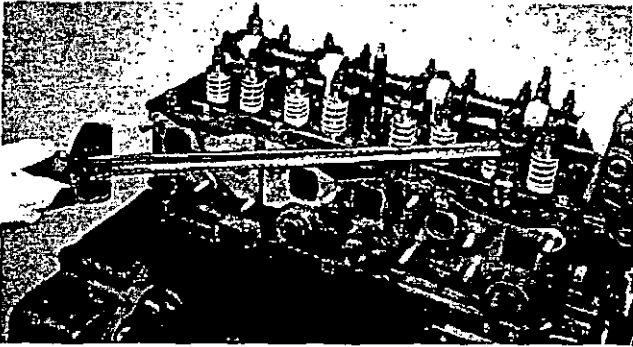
Tightening Cylinder Head Studs with a Torque Wrench
